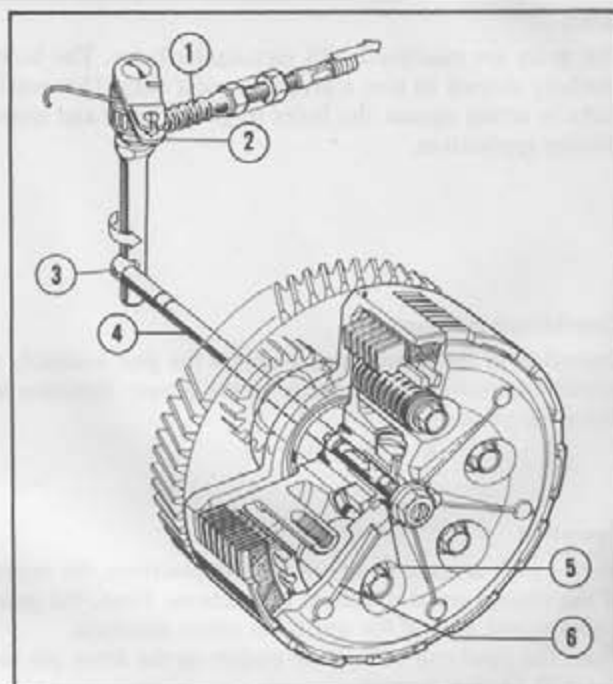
① Clutch cable ④ Clutch lifter rod
